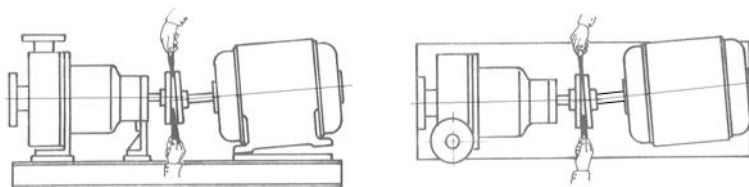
Angular: the maximum misalignment allowed is 0.8 mm (for a joint that has a 96 millimetre diameter).
